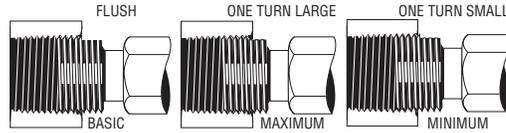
Gaging internal American National Taper pipe threads with working gage. When the internal thread is chamfered, the gaging point shall be the intersection of the chamfer and the pitch cone of the thread.
